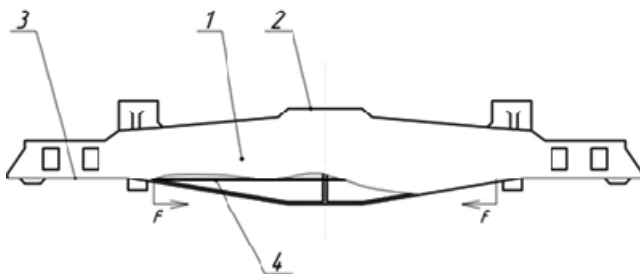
Pre-stressed bolster of a three-piece bogie:
